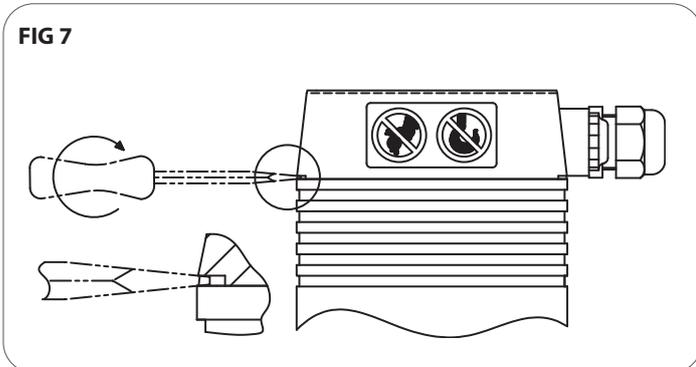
The top cover of the actuator can be removed by a screw driver. Place the screw driver in the groove and turn to open.
